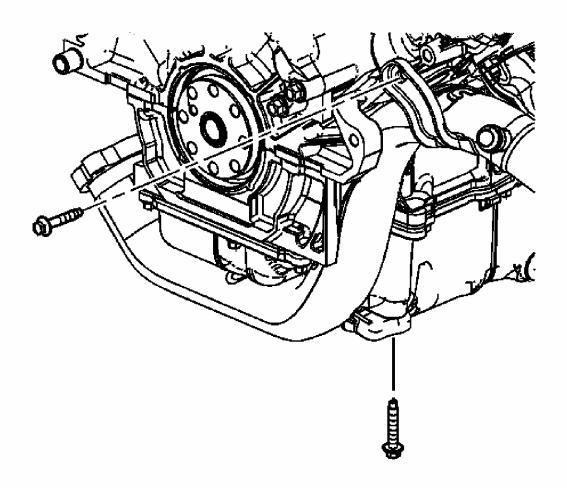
View Of Exhaust Intermediate Pipe Bolts Courtesy of GENERAL MOTORS CORP.
